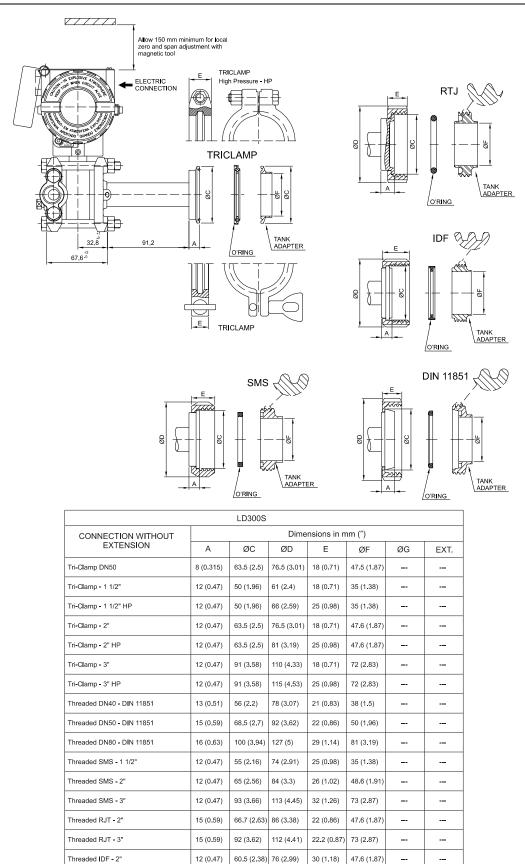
(e) - Dimensional Drawing and Mounting Position - Sanitary Transmitter without Extension
